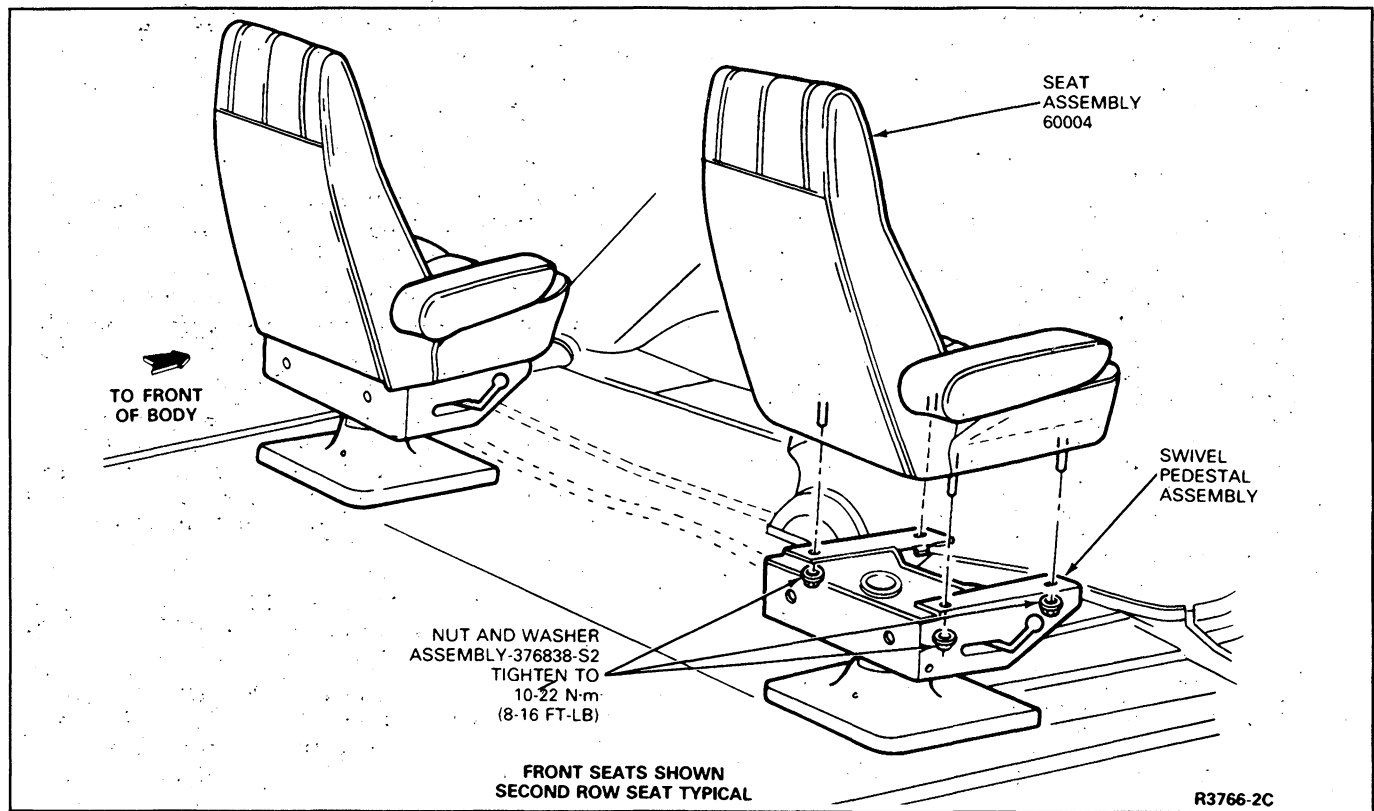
E-150—E-350 Captain's Chair Seat Support—Swivel Pedestal Shown, Fixed Support Typical
